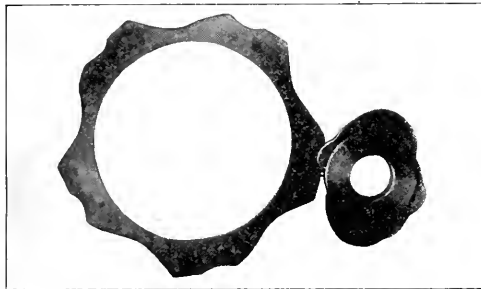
EXHAUST CAM FOR GNOME ENGINE AND CUTTER USED IN PRODUCING IT
